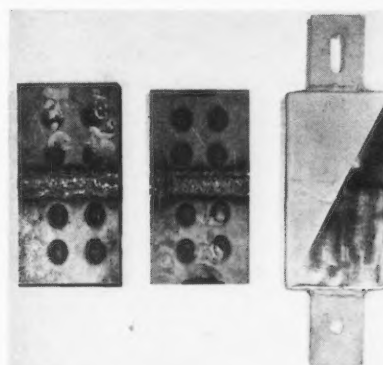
Preparation of corrosion test paddles. Specimens, left to right: 1—7/64-inch alloy liner spotwelded to 1/2-inch carbon steel plate. 2—Carbon steel machined to 1/4-inch overall thickness and scarfed for seal welding. 3—Finished paddle with duplex surface preparation: Sandblast and 120 grit polish.
